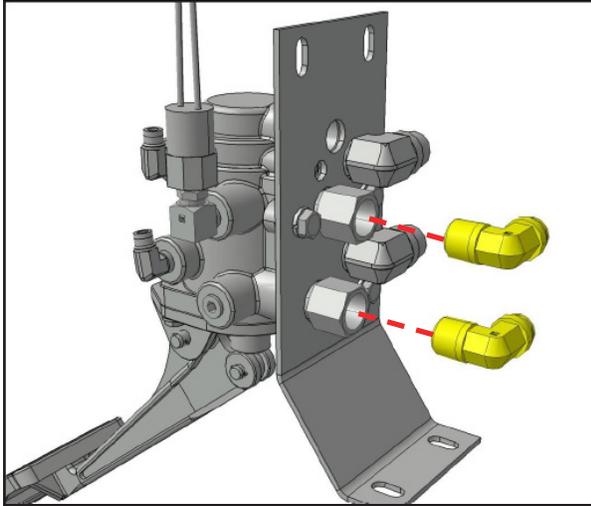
Remove and retain the two 90° push-to-connect fittings.
